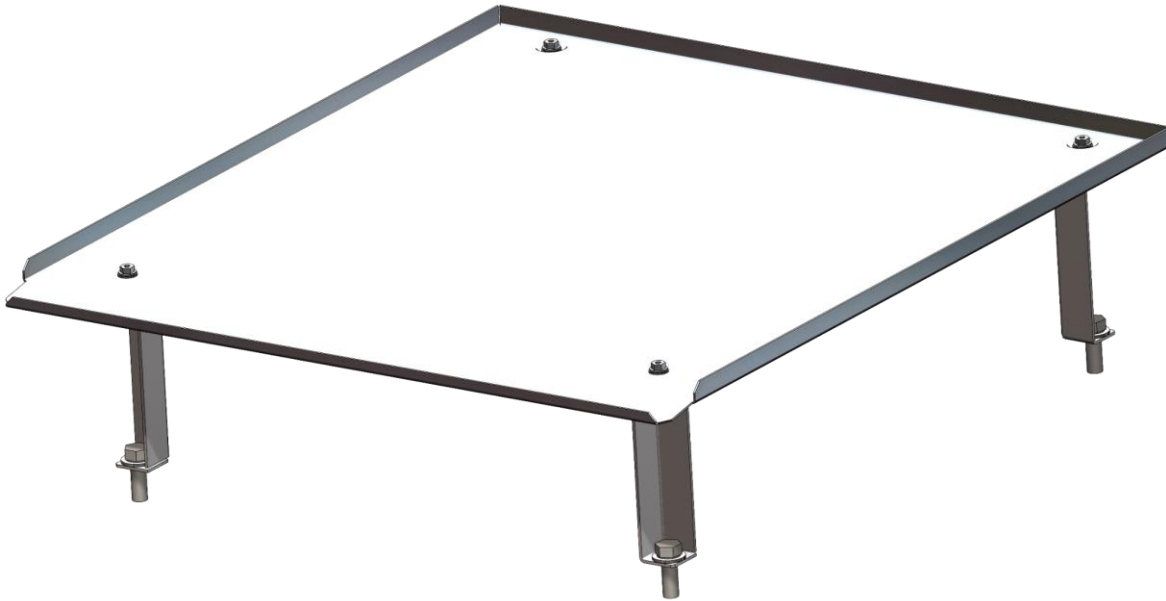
PCS100 AVC-40-1B Roof Kit Assembly
